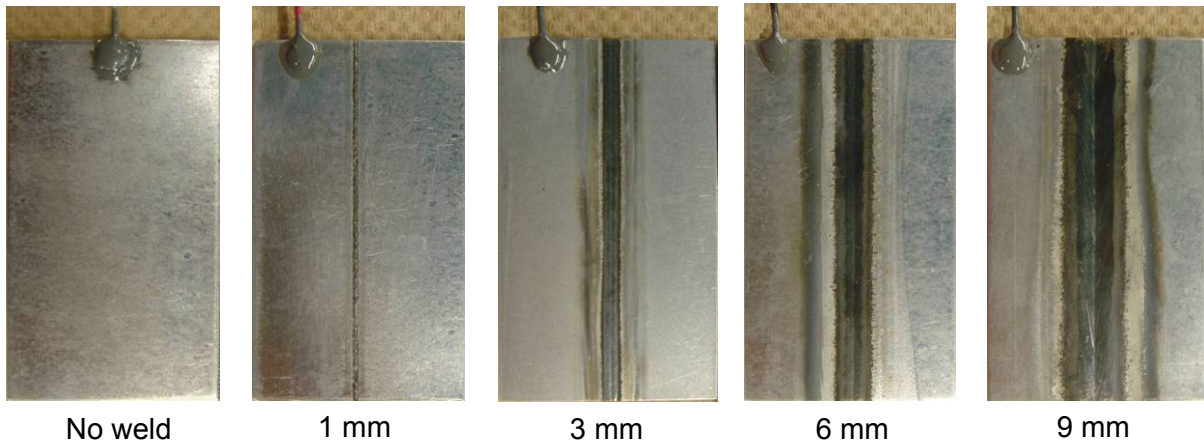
Prepared coupons having specific exposed widths after laser welding
